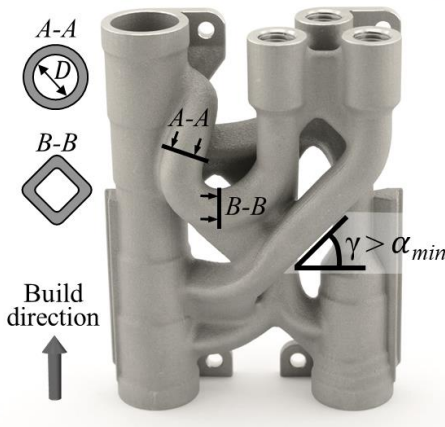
Hydraulic manifold fabricated using L-PBF of stainless steel [149] (initially redesigned by [26]).
